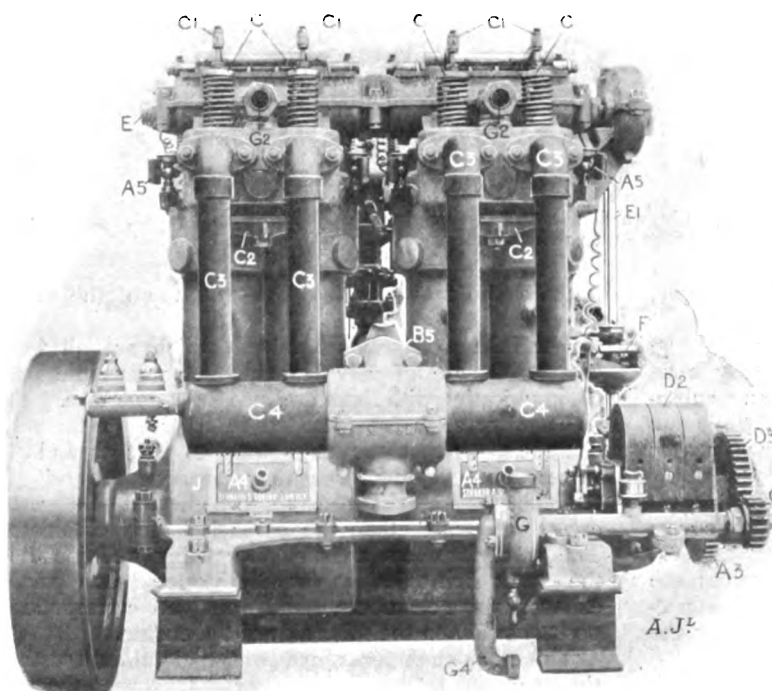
View of the 24-h.p. Straker-Squire Petrol Engine, from the right side, showing the Exhaust-Valves, Magneto, and Circulating Pump.
